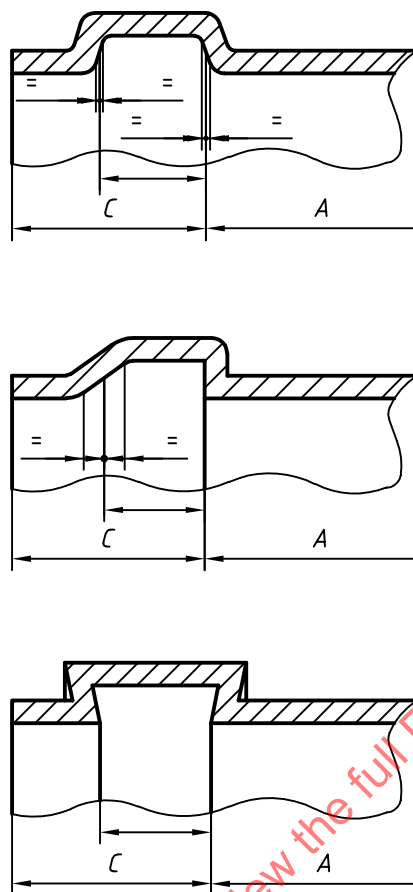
Typical groove designs for elastomeric ring seal sockets
